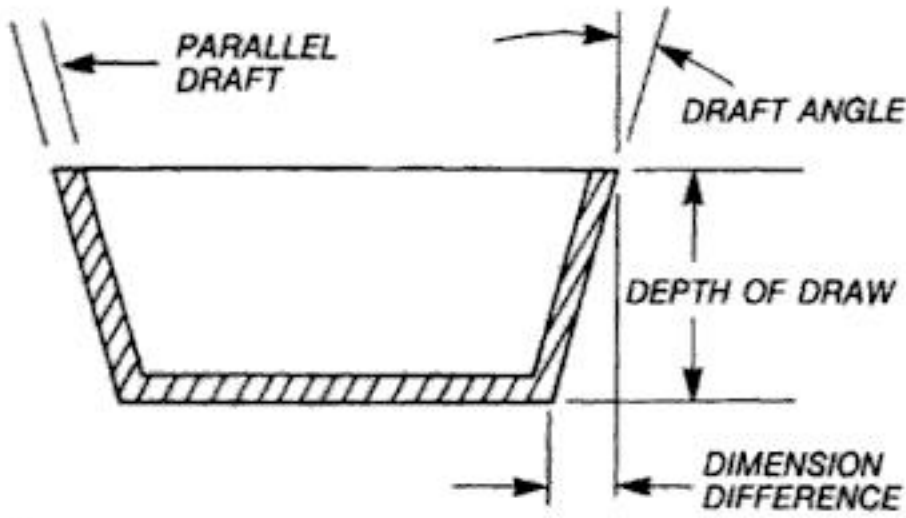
Example of mold-cavity draft angle required to ensure removal of molded product during its mold ejection action.
